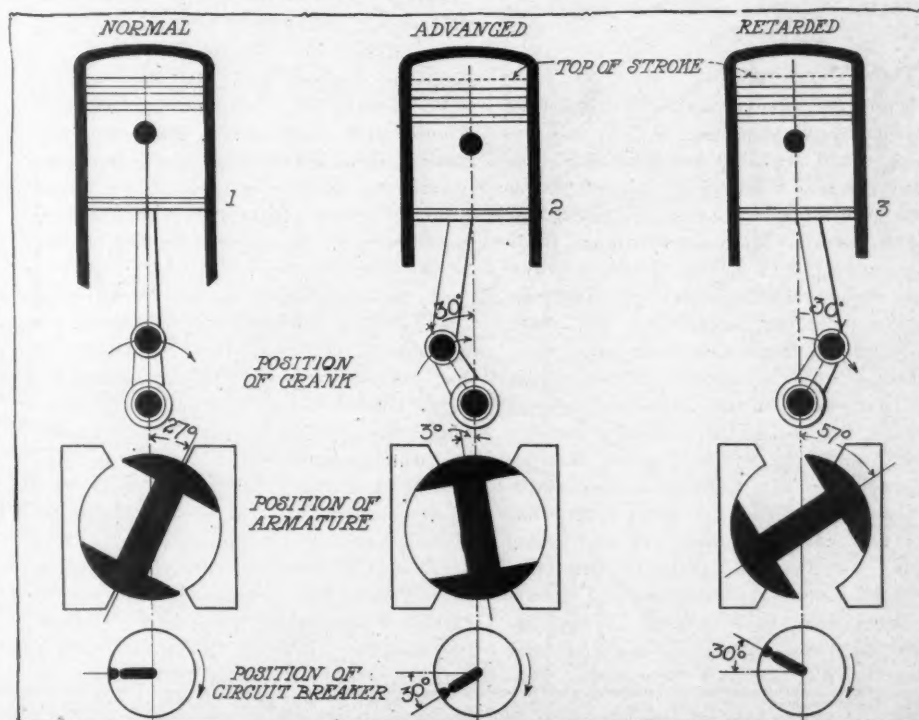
POSITIONS OF PISTON, MAGNETO ARMATURE AND CONTACT BREAKER
